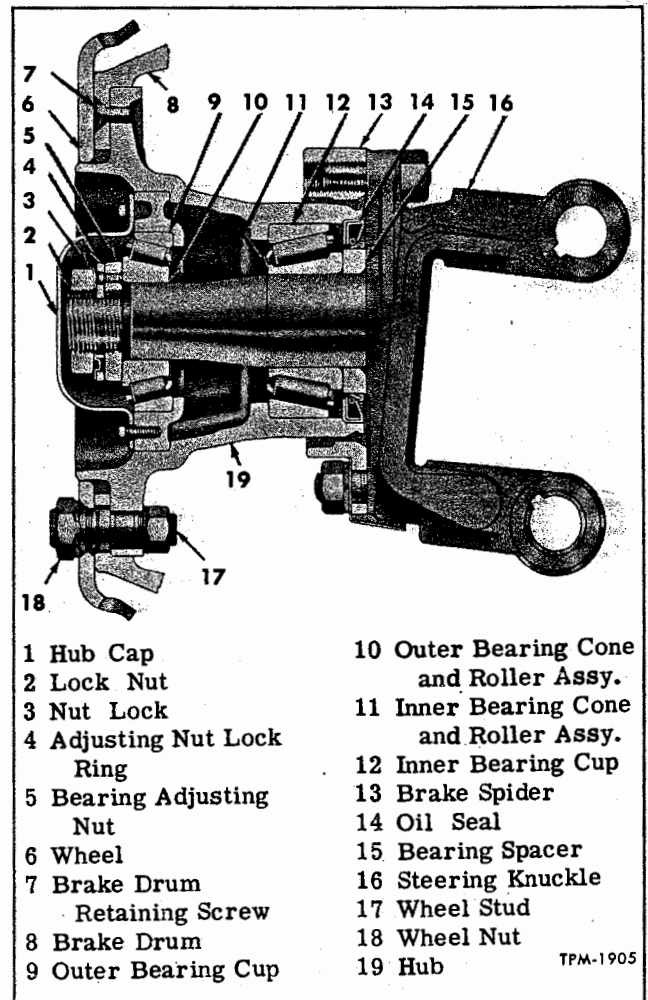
Standard Front Hub, Bearings, and Oil Seal
